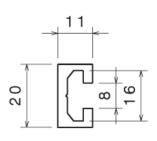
Experiment mounting rails and possible mounting solution using anchor bolt (M6)
